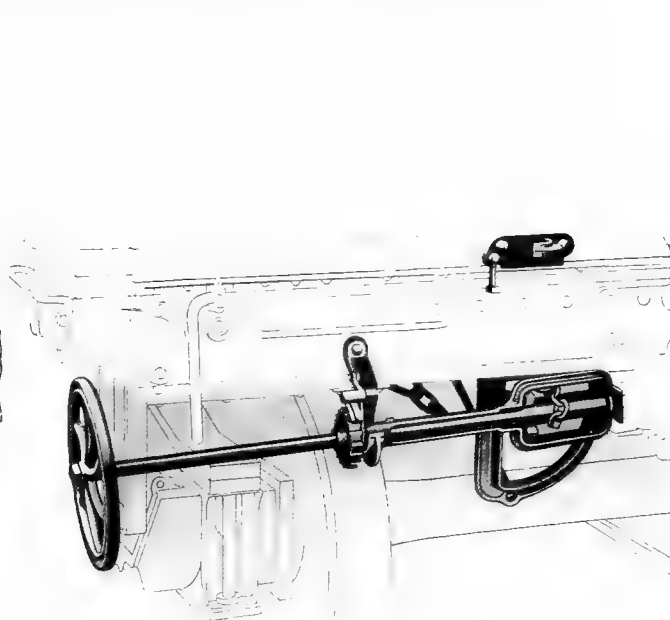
Barber Tilting Brake Staff Standard Car Truck Company.
